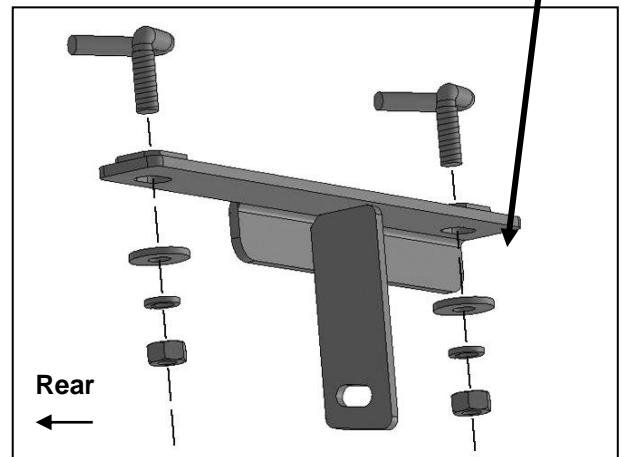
Trace outline of passenger/right center Bracket Support Pad onto cover
